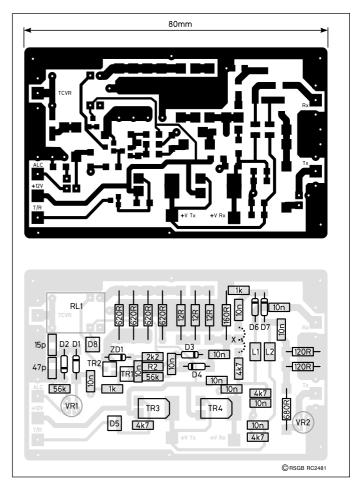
Printed circuit board layout. Most of the circuit is constructed from surface mounted devices, but wire ended resistors are used for the RF attenuator.
